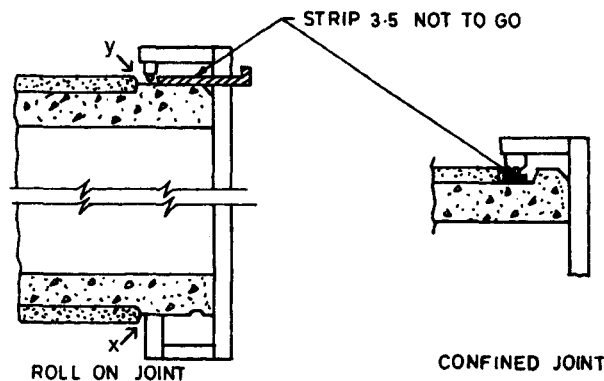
ARRANGEMENT FOR CHECKING SPIGOT DIAMETER
